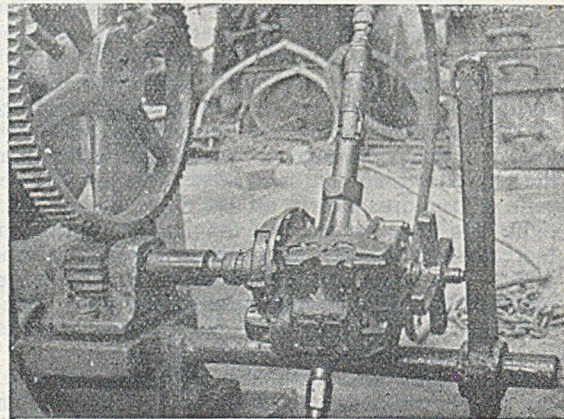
Close-up of the Air-motor showing method of Coupling and Gear Drive.
